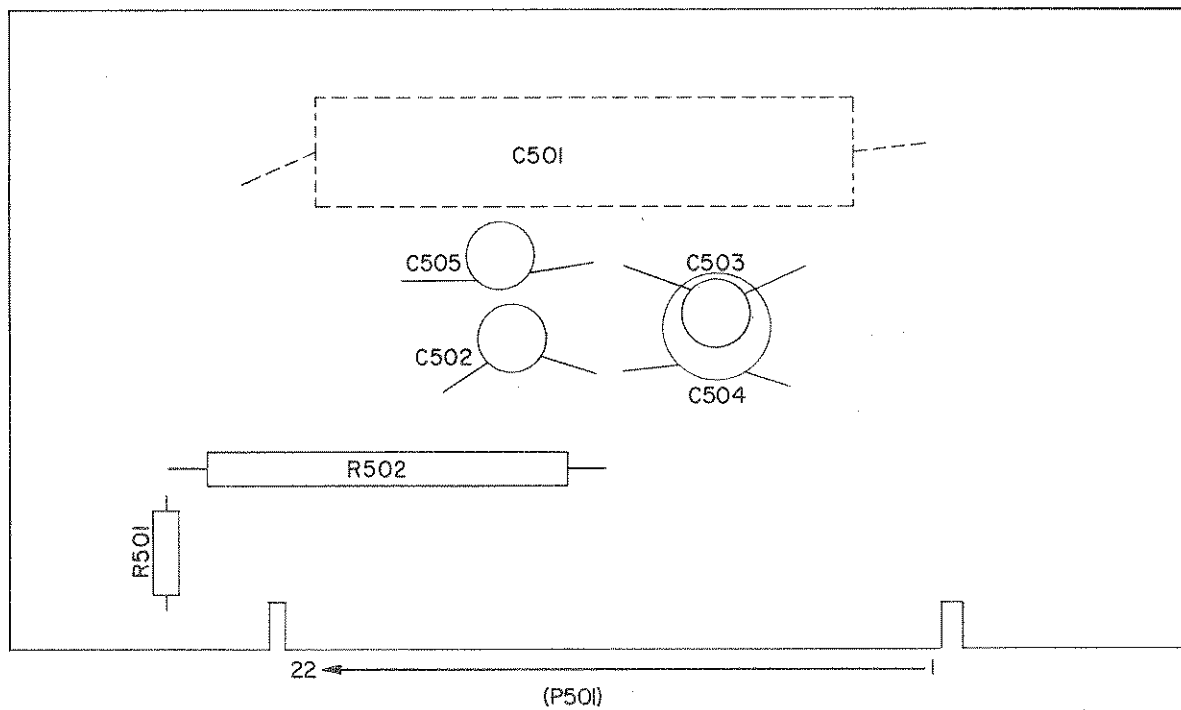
COMPONENT LOCATION, ASSEMBLY A5.
